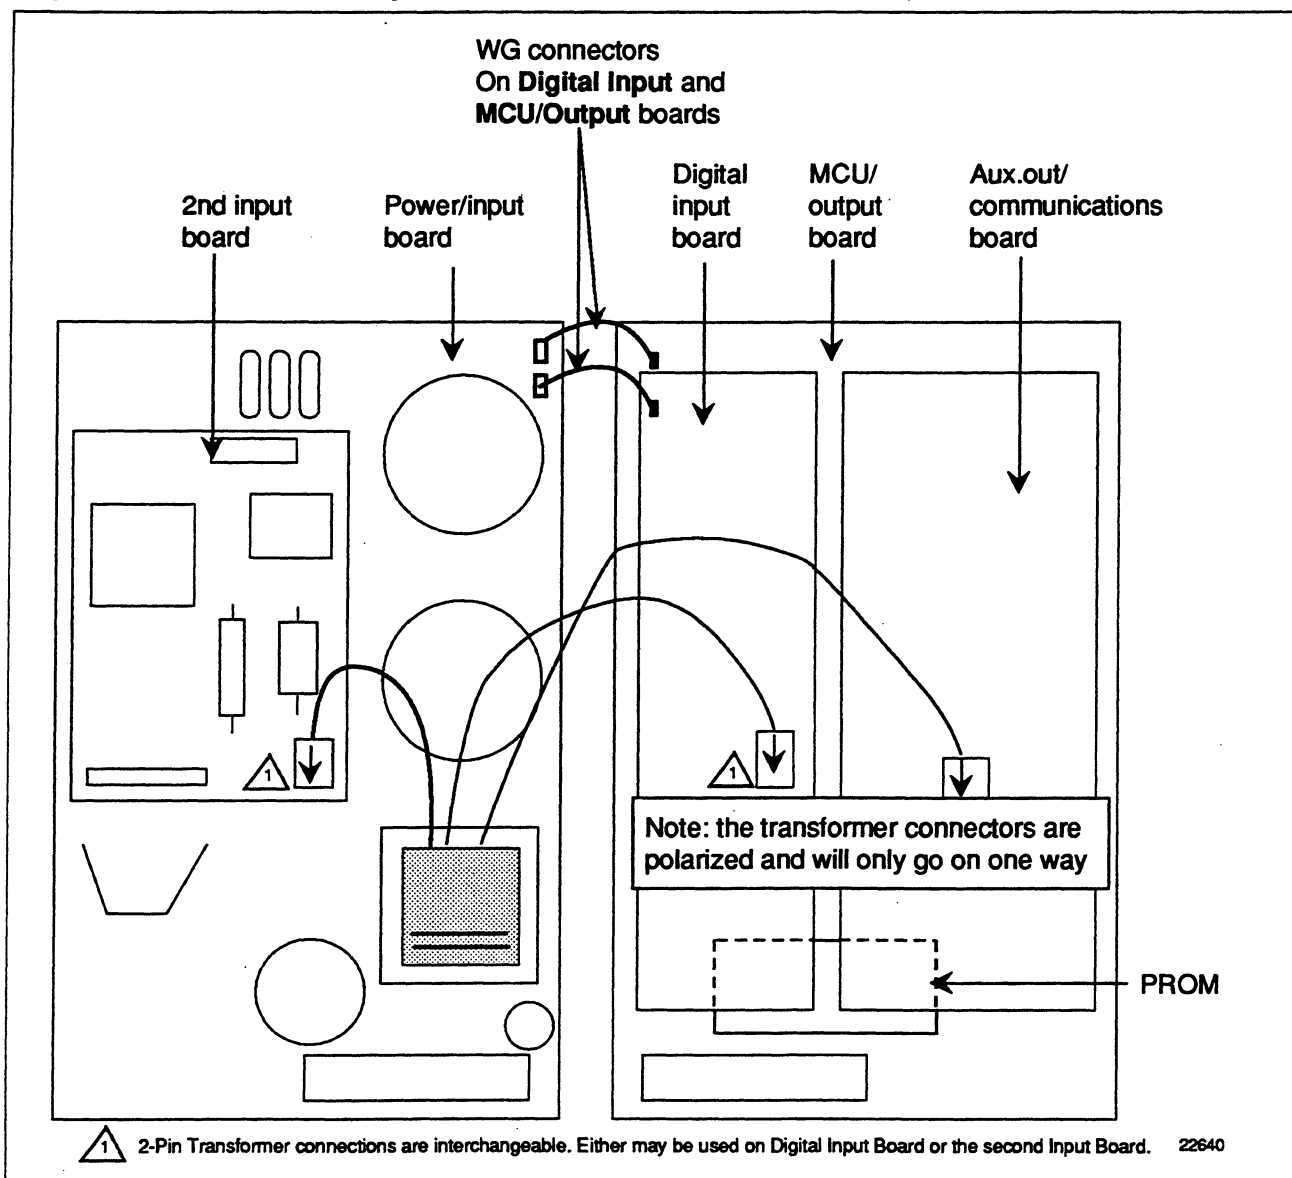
identifies each of the printed wiring boards that can be replaced. Refer to this drawing when following the replacement procedures for each of the boards, since you have to remove all of them from the chassis to replace the one you want.
